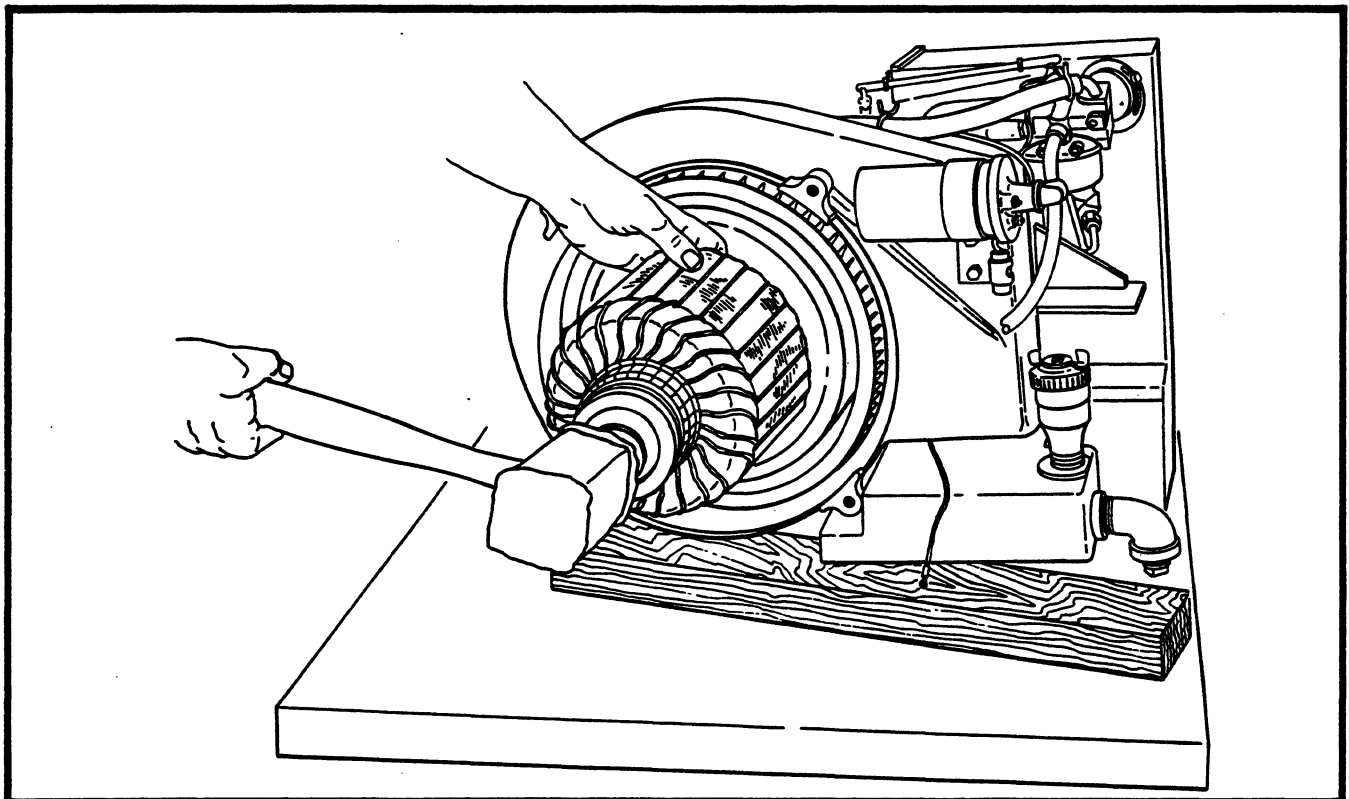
LOOSEN THRU BOLT THEN BUMP END TO SEPARATE ARMATURE FROM CRANKSHAFT
